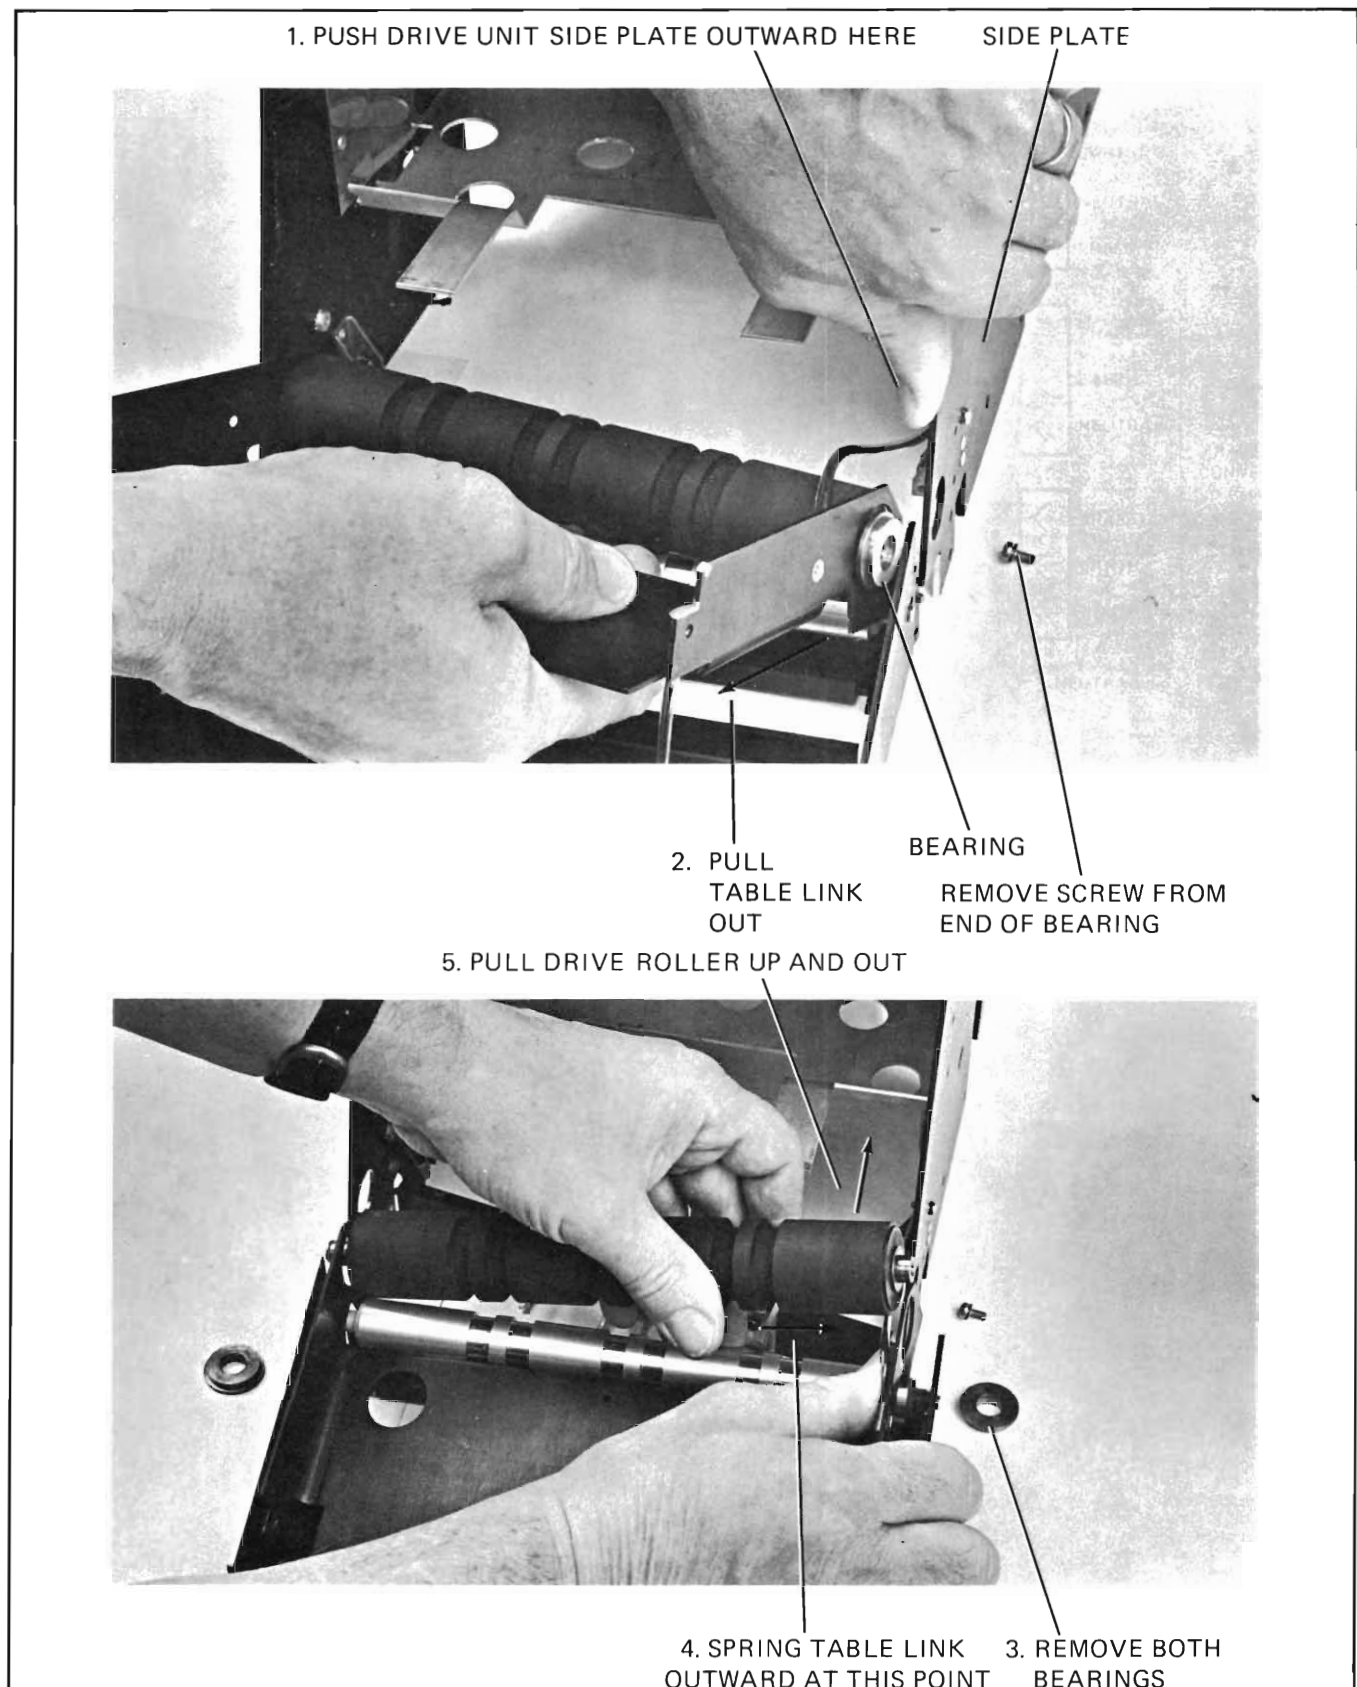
Drive Roller and Table Link Removal (Part 2)
